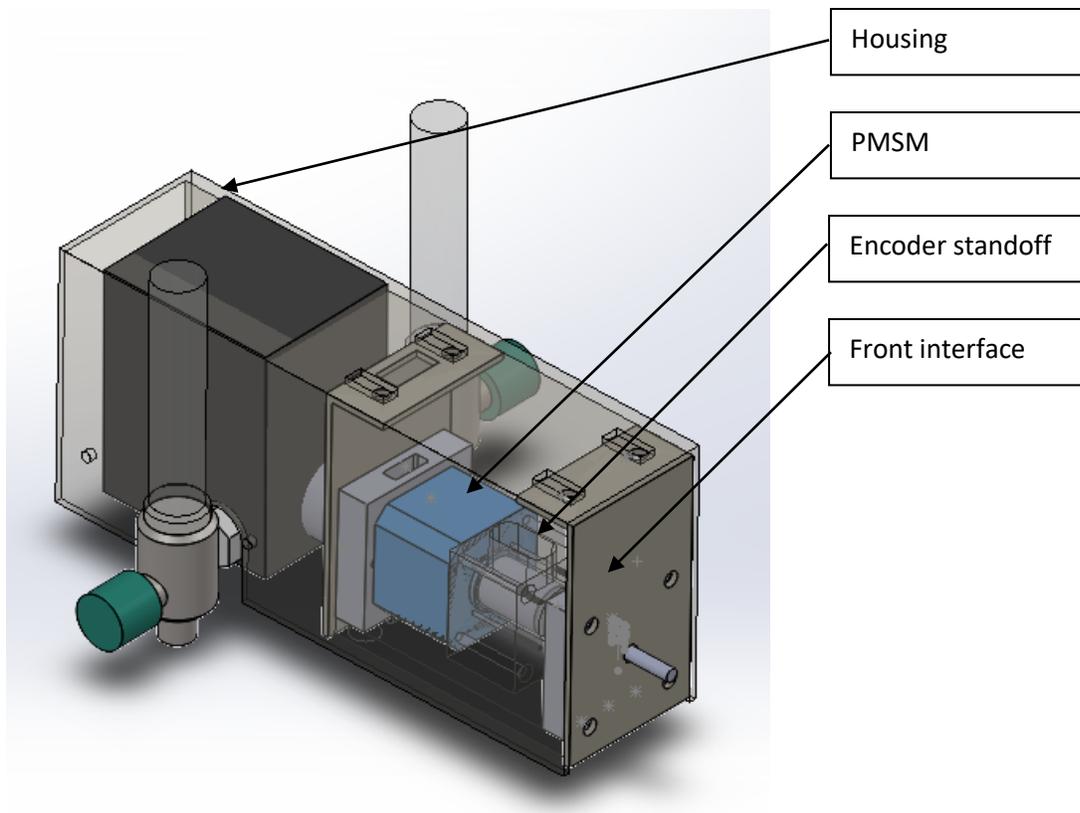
3-D representation of automated blend valve controller mechanical assembly
